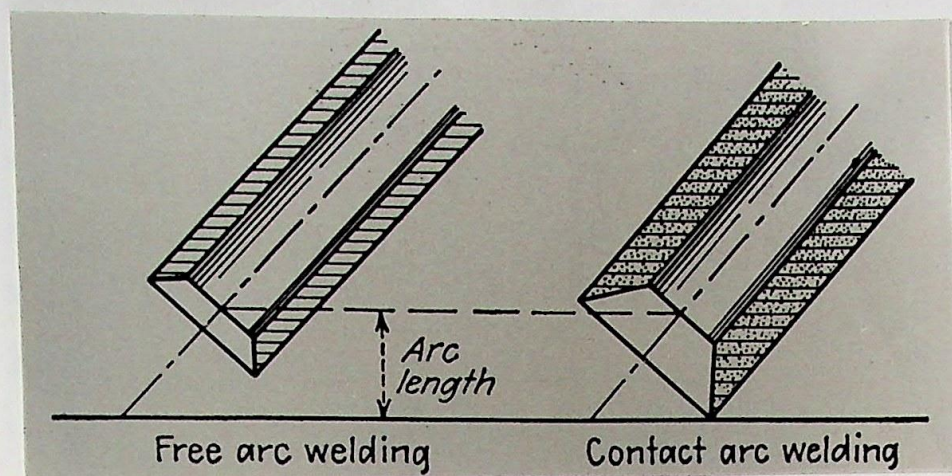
Free Arc Welding and Contact Arc Welding
